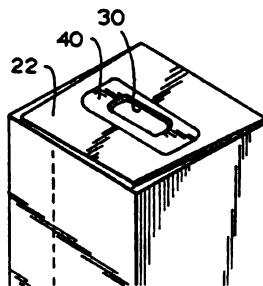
TE folding carton (22: front flap, 30: window, 40: tamper indicating seal)
